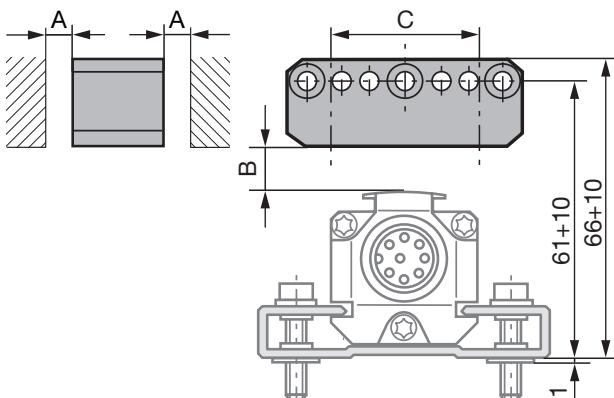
Dimensions and distances with BTL5-P-5500-2 magnet
